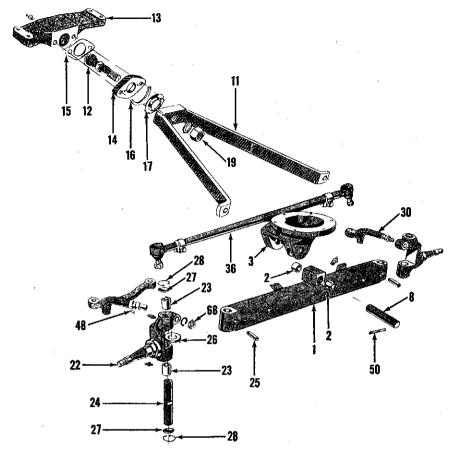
A — Exploded view of the front axle used on 404 and early 303. Refer to Fig. MH754 for legend.
